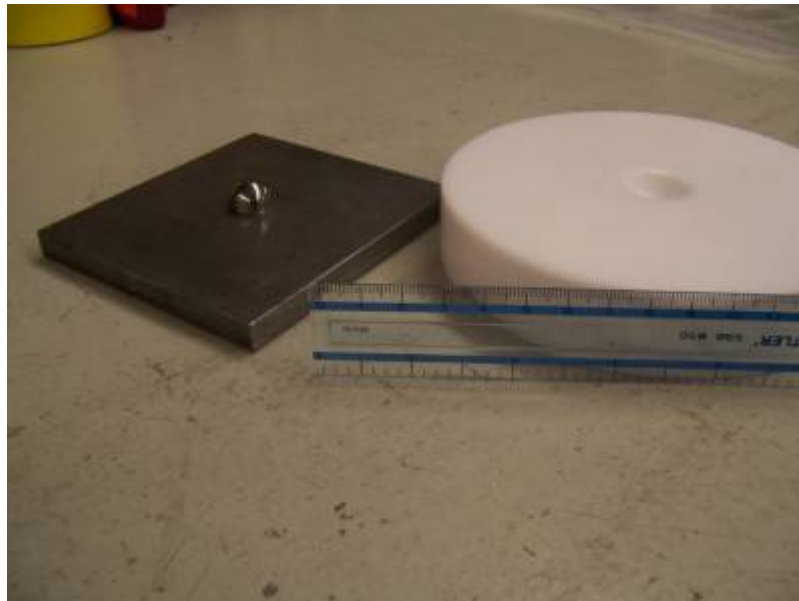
Forming Assembly Used to Dimple Specimens. (Picture shows the 9/16-in case).
